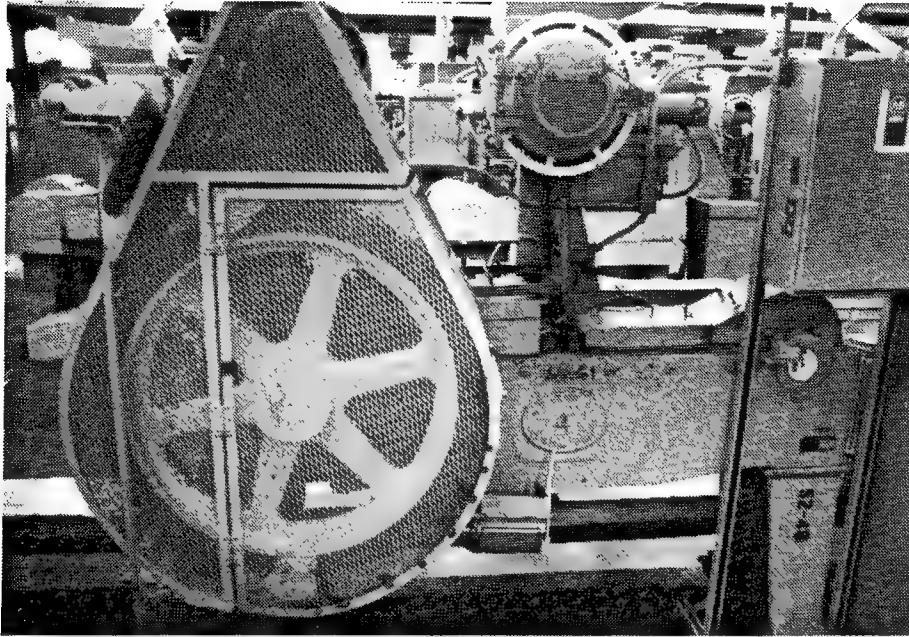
Building 4: Pocket Header Machine manufactured by E. W. Bliss Co.
